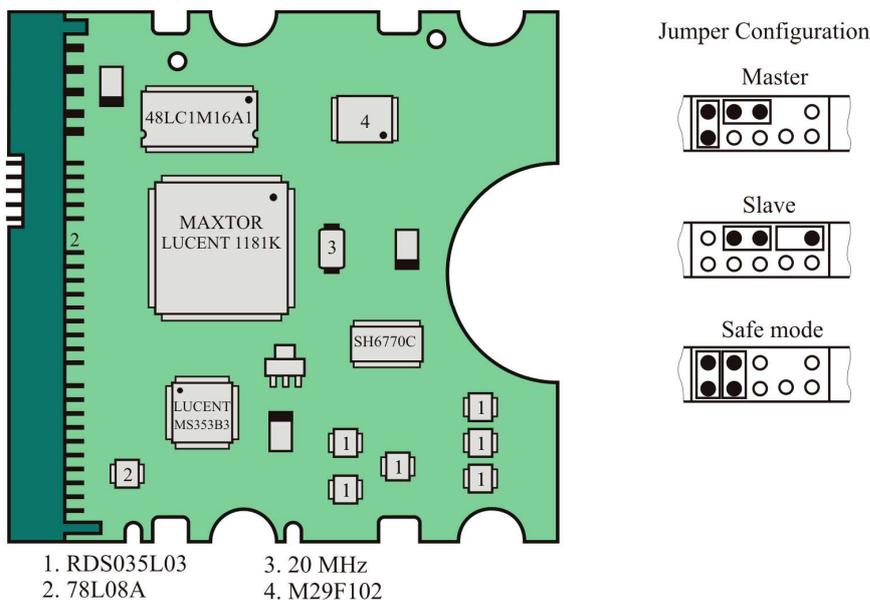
External view of the controller board in MAXTOR PROXIMA drive family.
